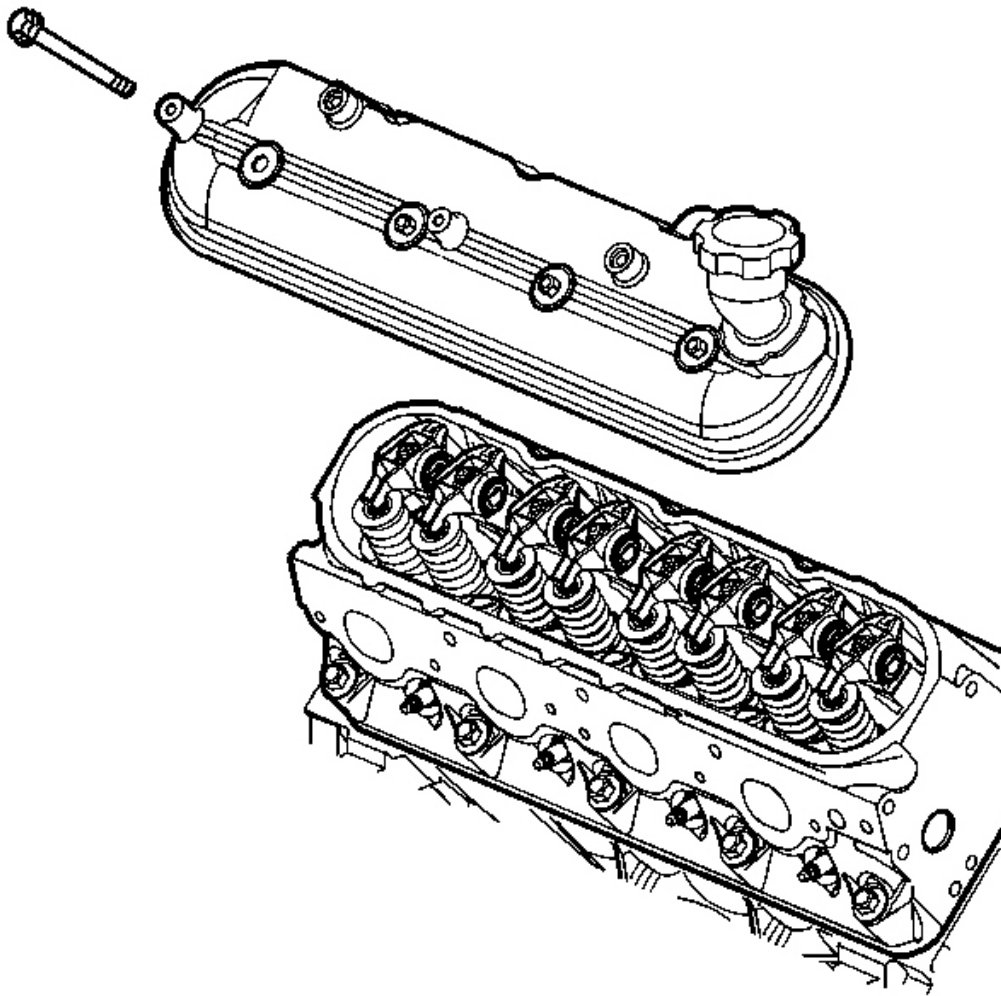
View Of Valve Rocker Arm Cover & Bolts (Right)
